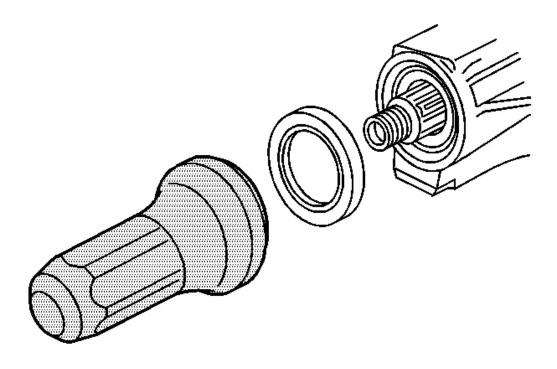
View Of Pinion Gear Oil Seal & Installation Tool Courtesy of GENERAL MOTORS CORP.
